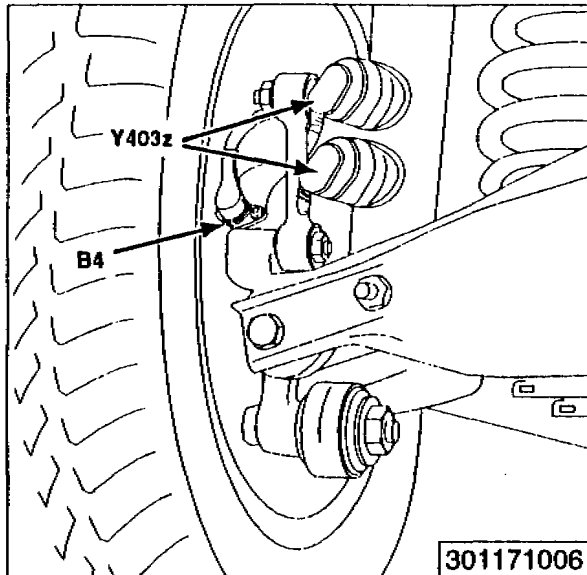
Behind LH front wheel RH rear wheel similar
